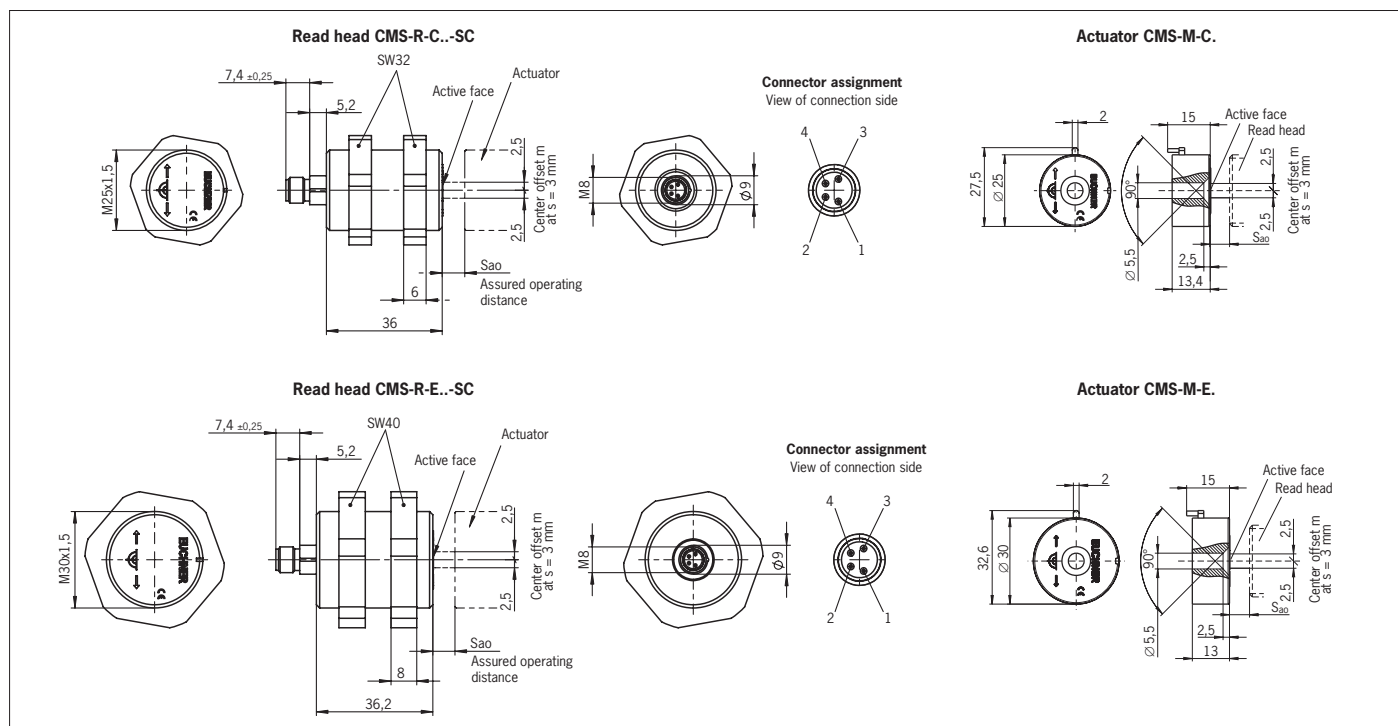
Dimension drawings for read heads CMS-R-C...-SC / CMS-R-E...-SC
